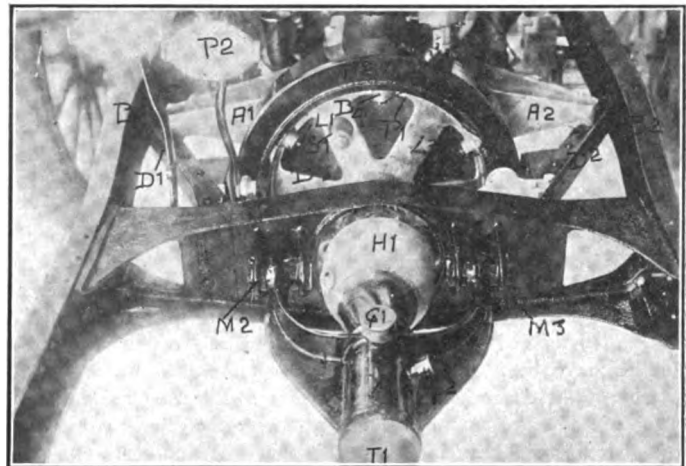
Looking at the clutching mechanism and universal joint, also the torsion tube yoke and other features of design
